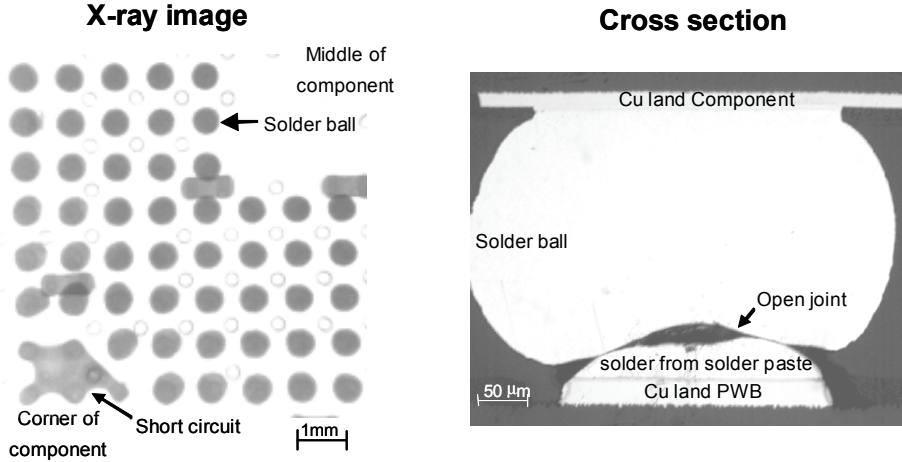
Soldering defects caused by BGA warpage. Left: an x-ray image of short circuited solder balls in the corner of BGA. Right: an open solder joint in the middle row of a BGA.
